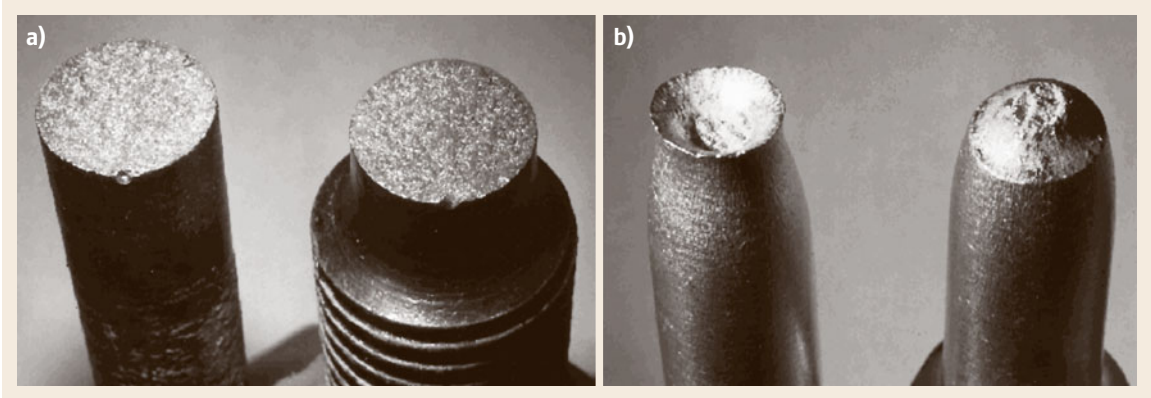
,b Appearance of fracture surfaces after tensile testing. (a) Brittle fracture leads to a relatively flat surface, whereas (b) ductile fracture shows considerable deformation prior to fracture, leading to a classical cup-and-cone arrangement
